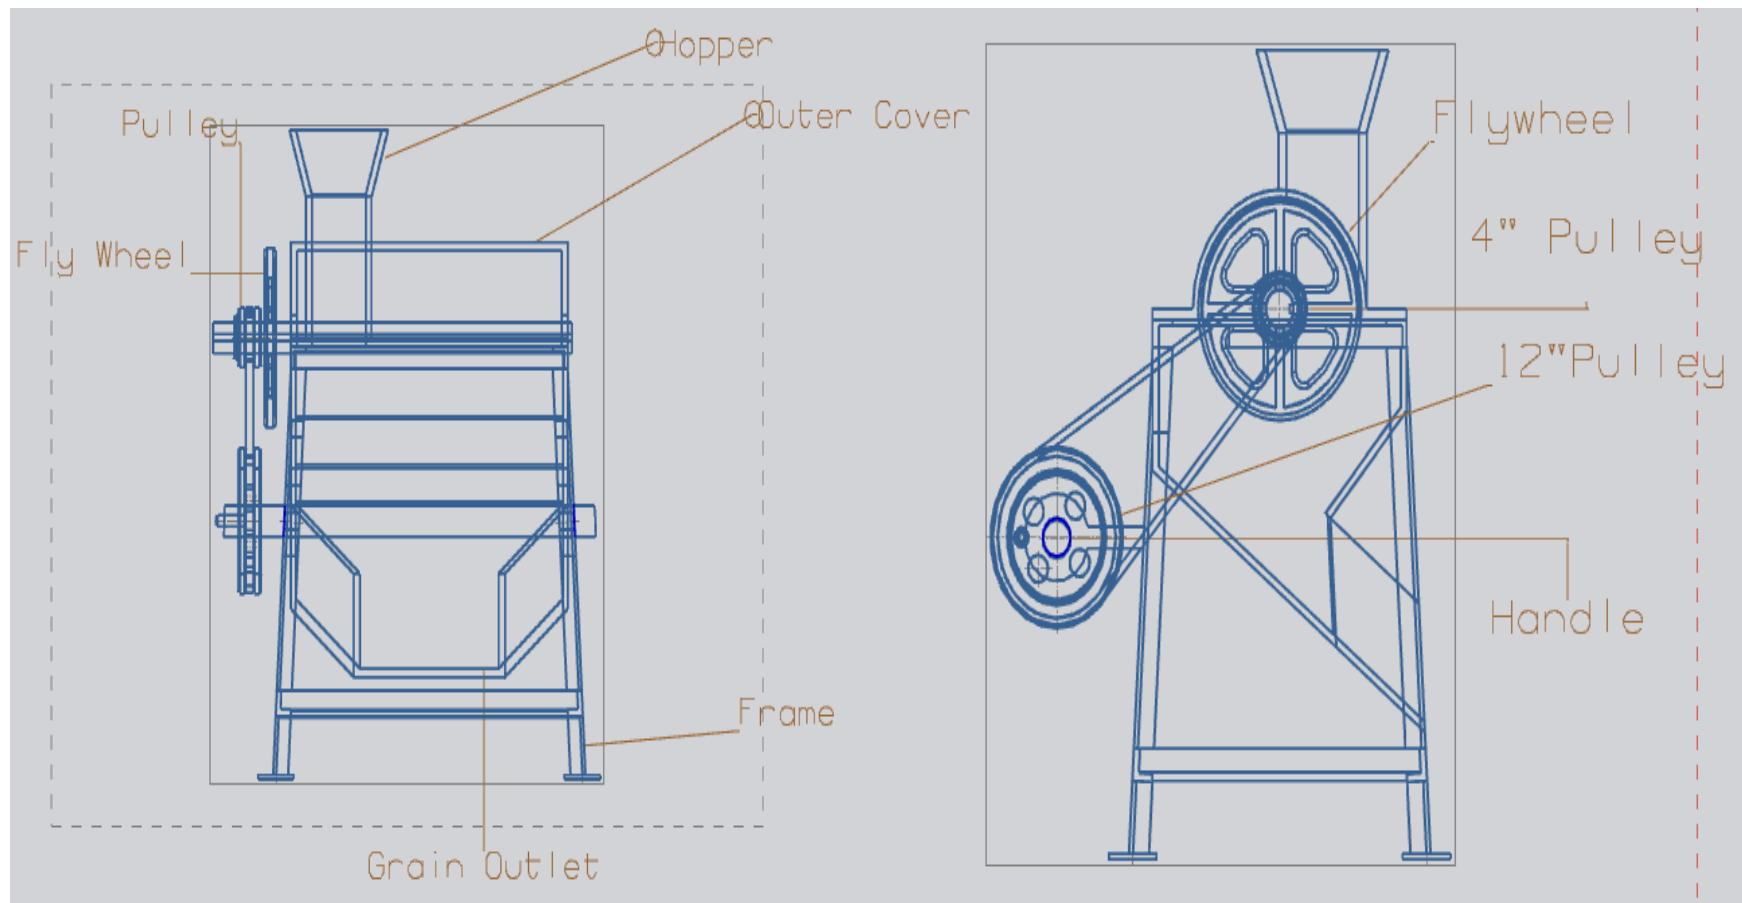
Schematic diagram of modified ANGRAU hand operated maize sheller
